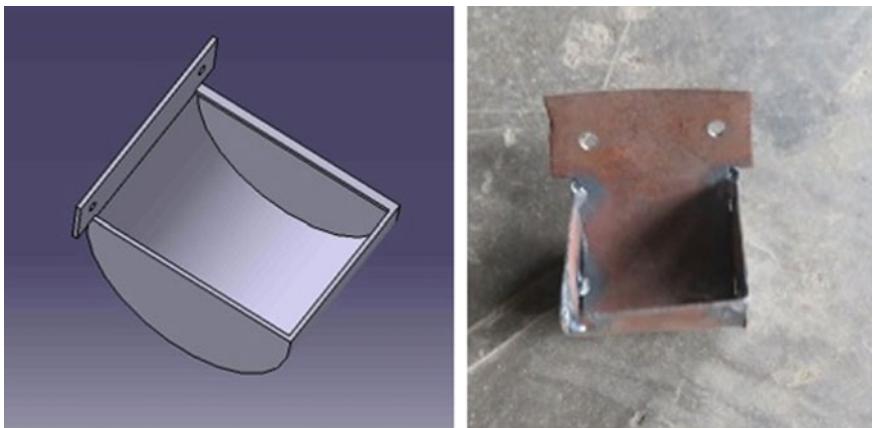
Semi-circular shape of a bucket for ginger seed metering unit
